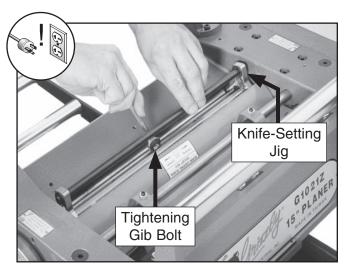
Example of using knife-setting jig to set knife height on Model G0890.
